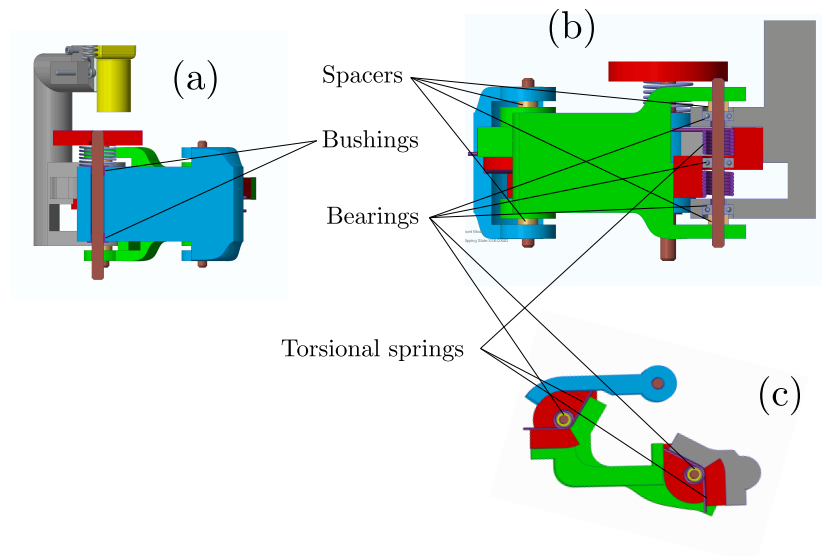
View cuts of the torsional spring-loaded joints. (a) is a front view, (b) is a side view and (c) is a top view.
